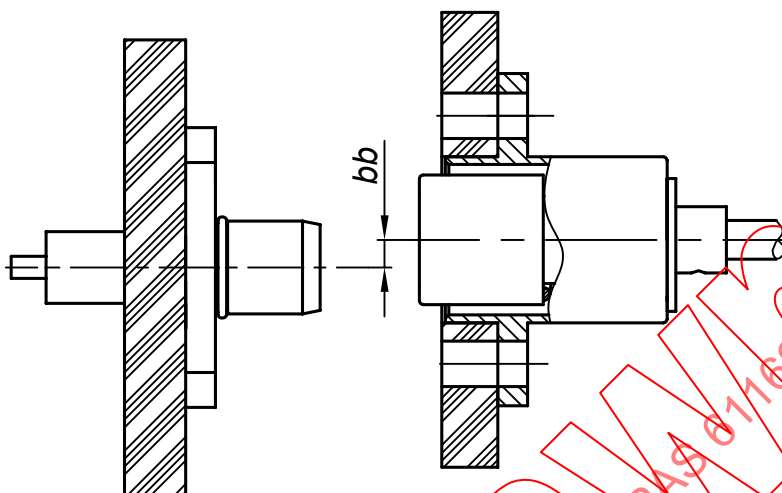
A rigidly mounted connector with socket-centre contact and float-mounted connector with pin-centre contact radial misalignment limits
